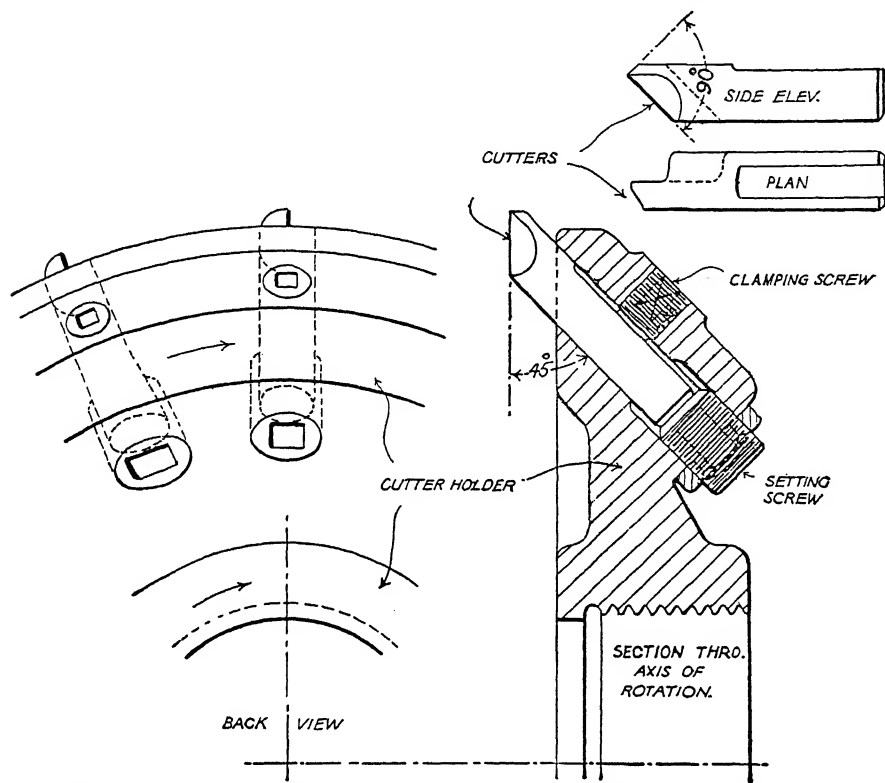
“Wrigley” High-speed Cutters for Aluminium, adjusted with Screw and locked with Nut
